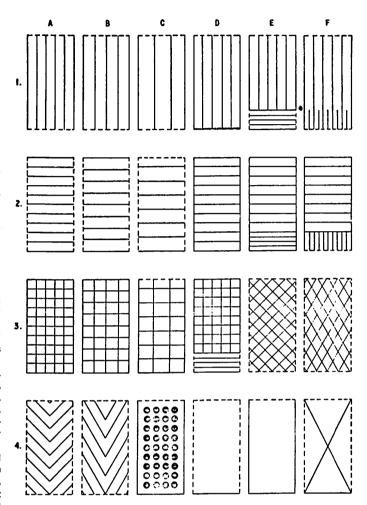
Weld bead pattern and spacing on 100mm x 50mm plates (solid lines — hardfacing).
